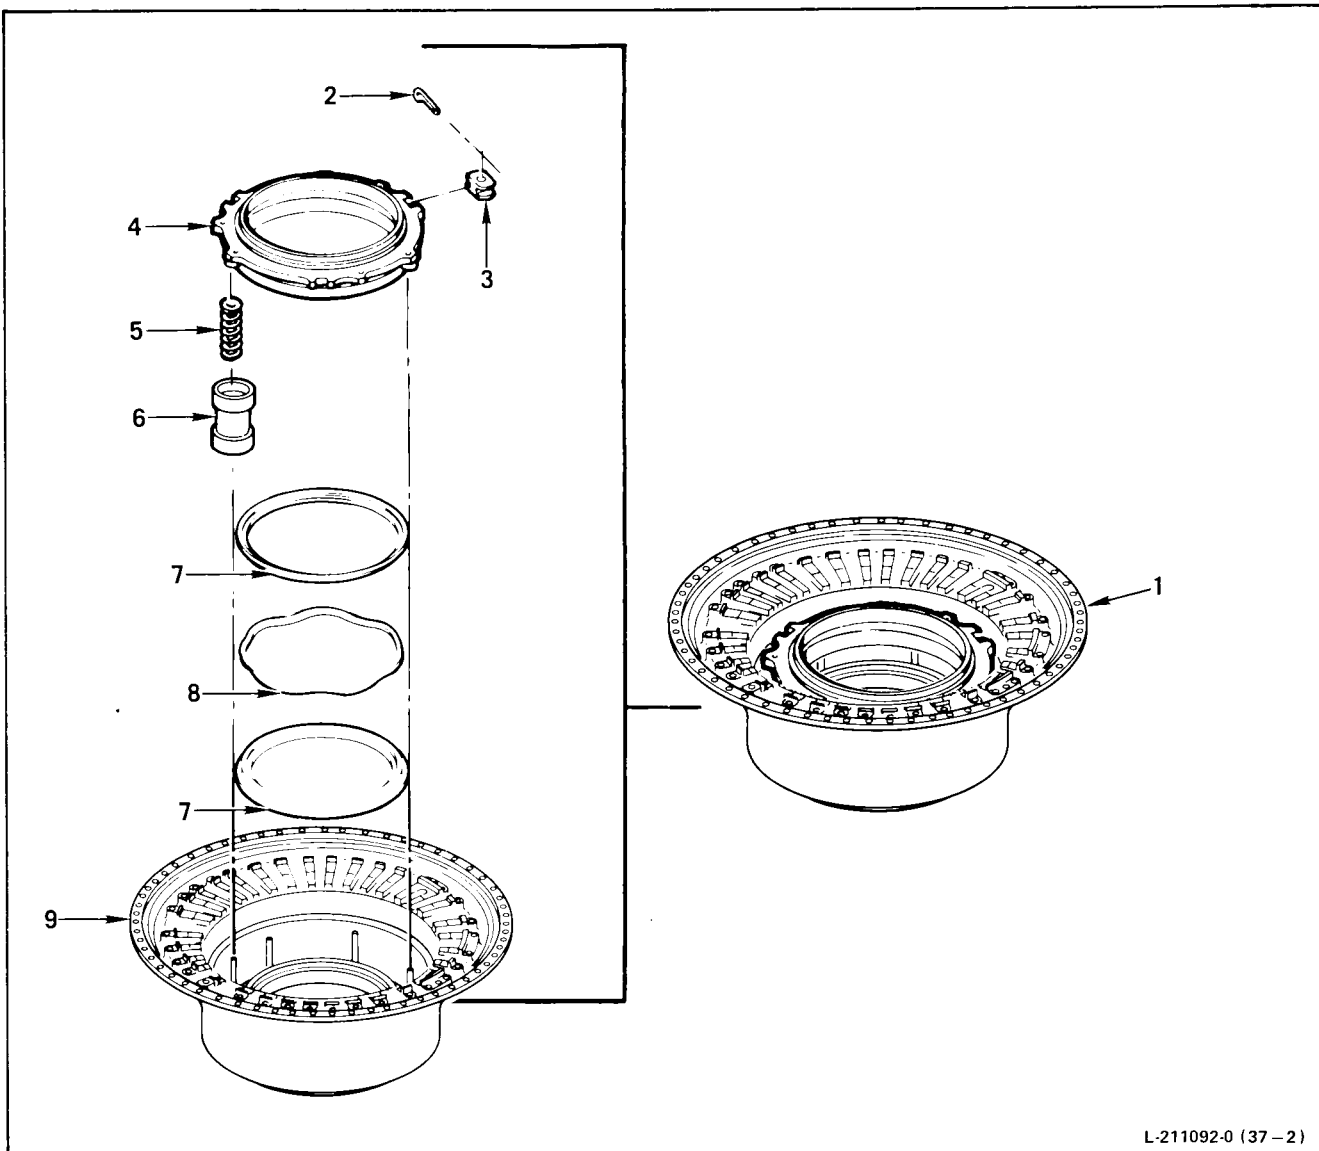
No. 3 Bearing Rear Seal Assembly (PN 4075036-01) -Disassembly
